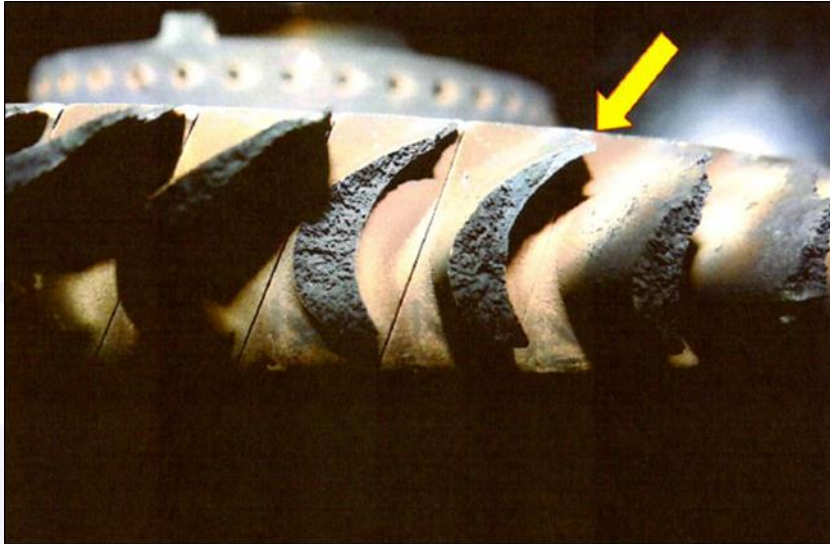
Top view showing the type of flat fracture in one of the blades.
